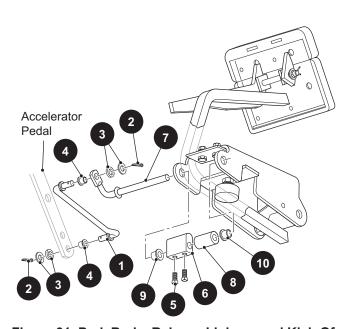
Park Brake Release Linkage and Kick-Of Cam Removal and Installation
